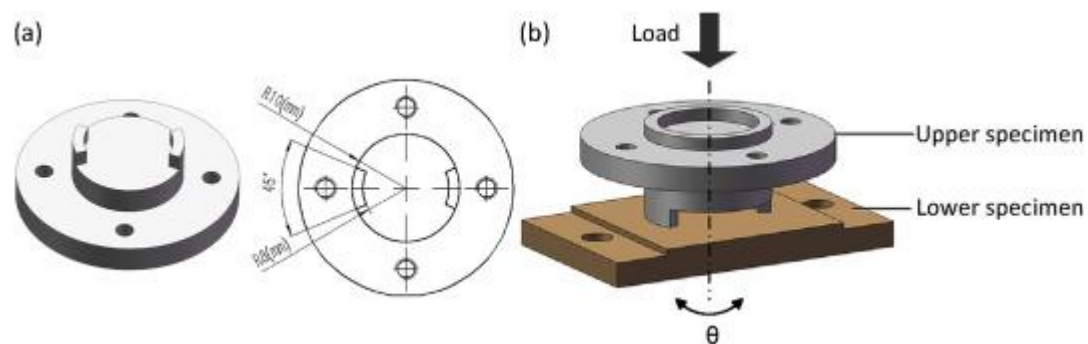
Schematic diagram of the torsional wear tester: (a) Upper specimen; (b) Contact between the upper and lower specimens.
